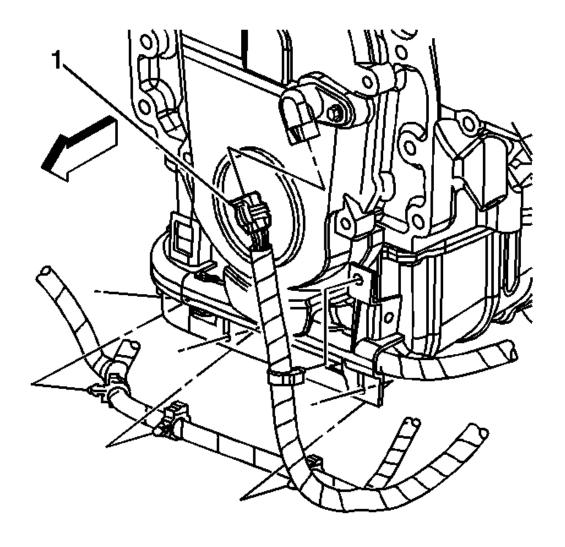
View Of Camshaft Position (CMP) Sensor Electrical Connector Courtesy of GENERAL MOTORS CORP.
